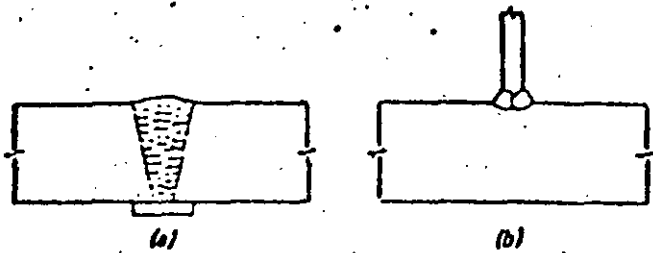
A groove-welded butt joint in thick plate (a) requires a higher preheat, because of joint restraint, than a fillet-welded joint of a thin member and a thick plate (b). See Section 2.3 for the minimum size weld required by AWS.
